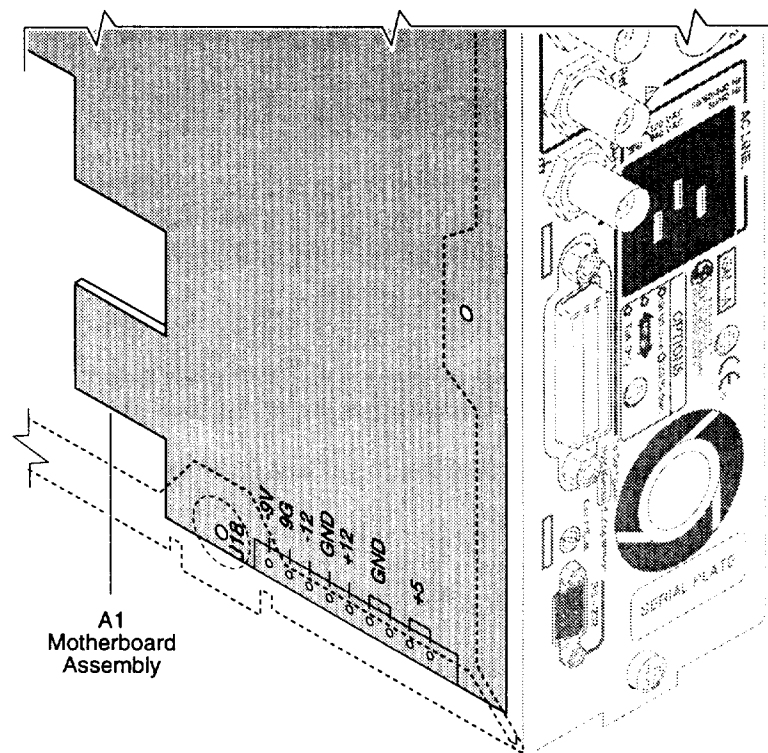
A4 AC Power Supply Testpoint Locations on A1 Motherboard Assembly (Bottom View)
